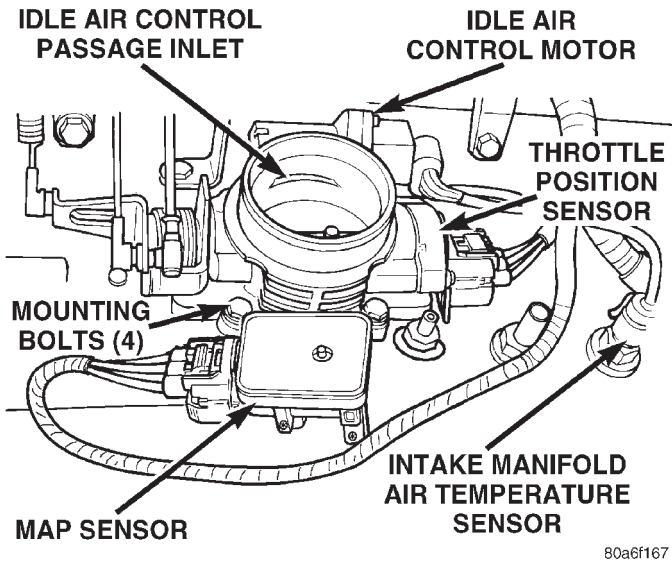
Intake Manifold Air Temperature Sensor—4.0L Engine
